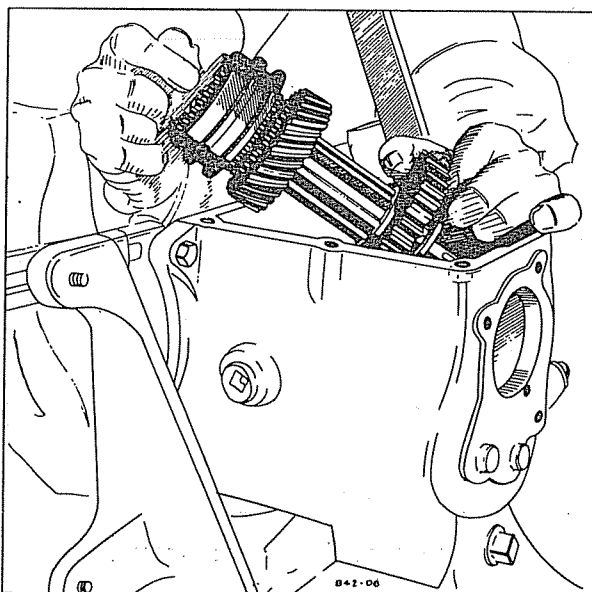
Removing Mainshaft Assembly (3-Speed).
